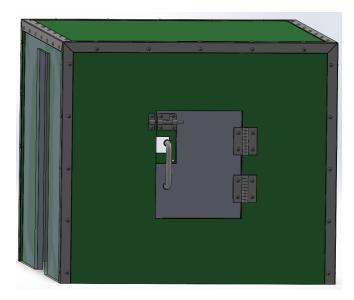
Slide-bolt latch installed on the door and front acrylic.
